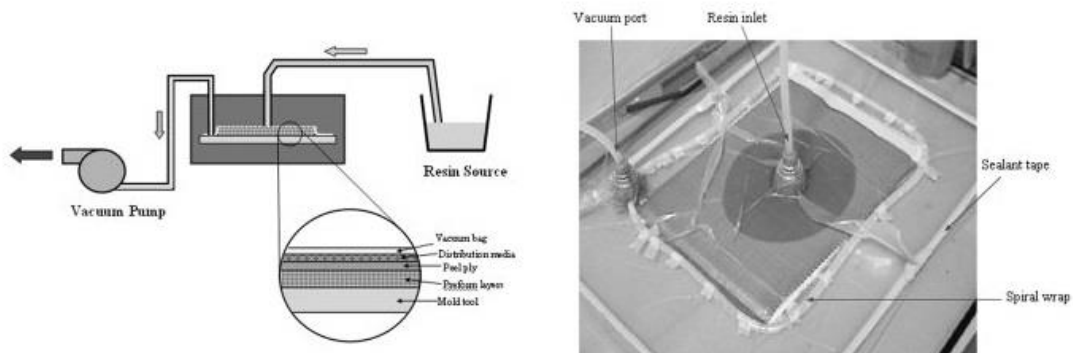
Vacuum assisted resin transfer molding (RTM) process and fabrication setup [140].
